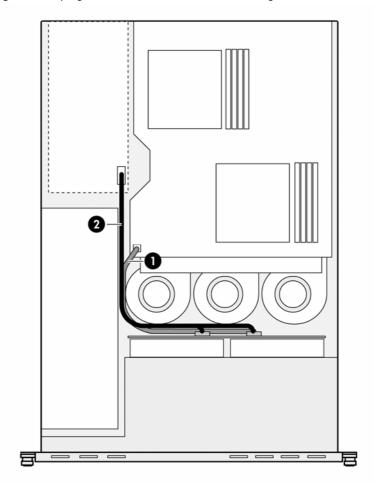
shows the hot-plug hard drive cable routing when the server has a low-profile PCI Express x4 or PCI-X hot-plug SATA/SAS controller board installed. Figure 9 shows the hard drive cable routing when the server has a full-sized PCI Express x16 hot-plug SATA/SAS controller board installed.
